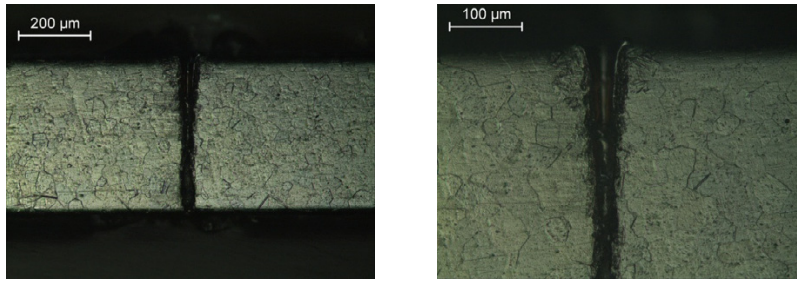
Cross section of a laser microdrilled hole before chemical etching
